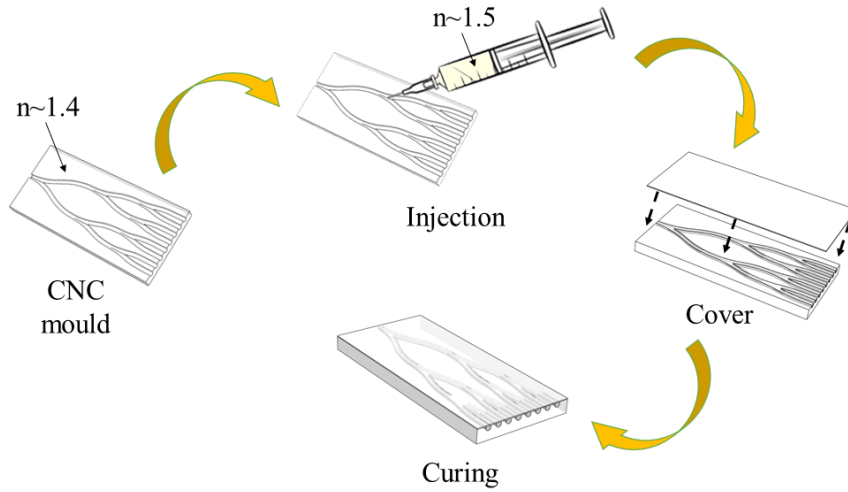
Manufacturing process. A CNC machined PTFE part is used as mould, a soft material with refractive index higher than PTFE is injected into the machined channels, a PTFE sheet is used as cover and the mould is left drying.
